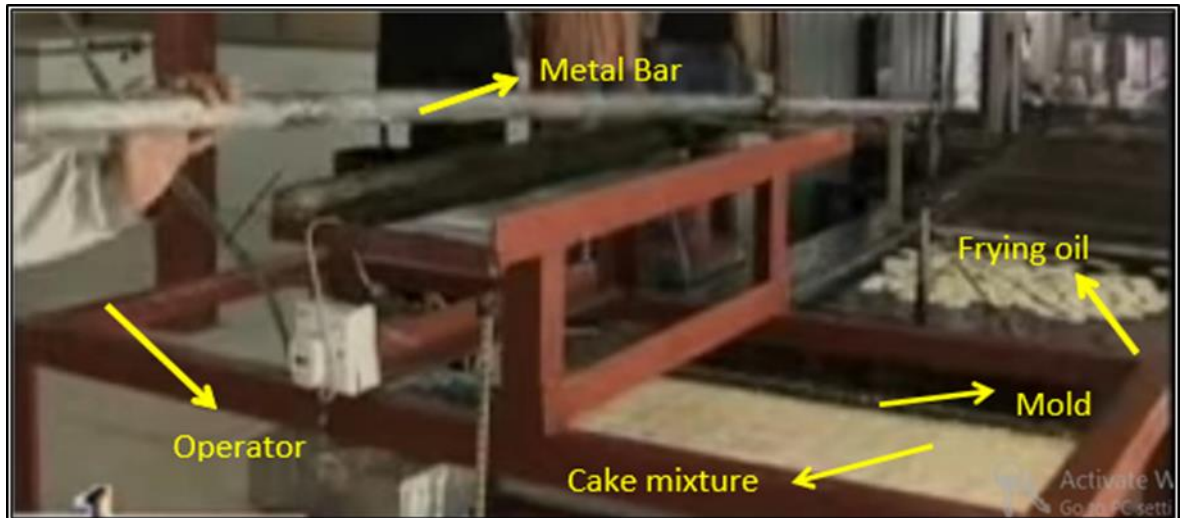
Operator handling the mold to produce Kuih Loyang.
